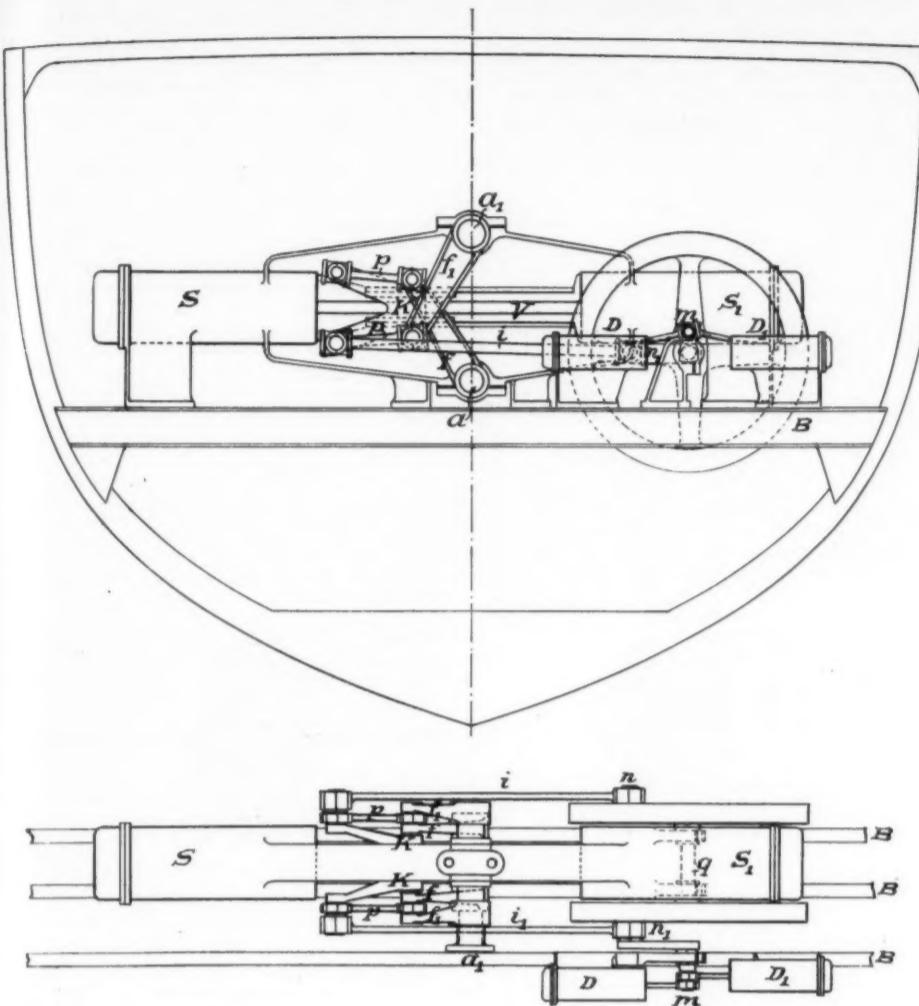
Sketch of Diesel Motor for Pendulum Propellers.
